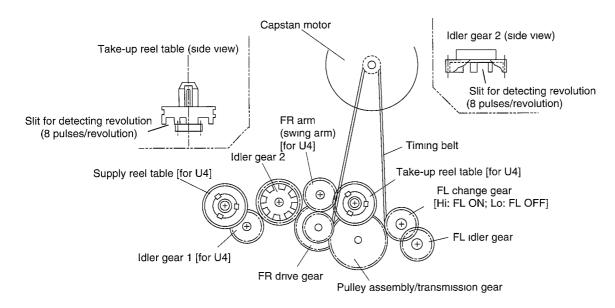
Mechanism that Drives Reel Tables and FL Mechanism (Top View)
